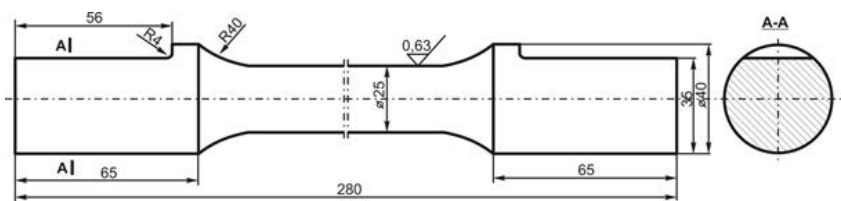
Shape and dimensions of the test elements after surfacing and mechanical treatment
